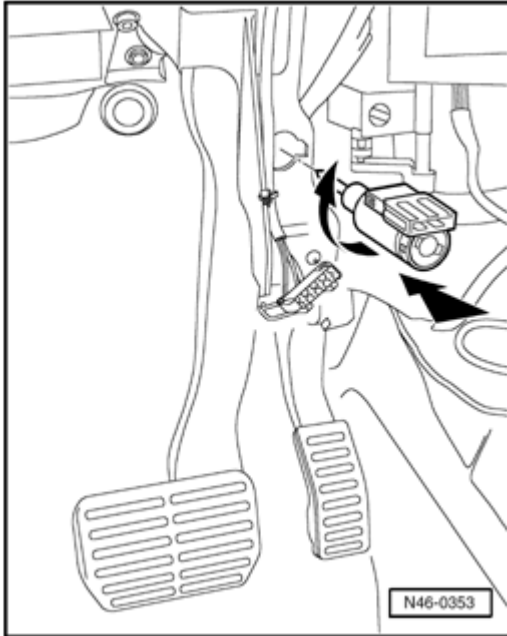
Guiding Switch Through Installation Hole, Pressing Against Pedal And Securing By Turning 45Degrees Clockwise
